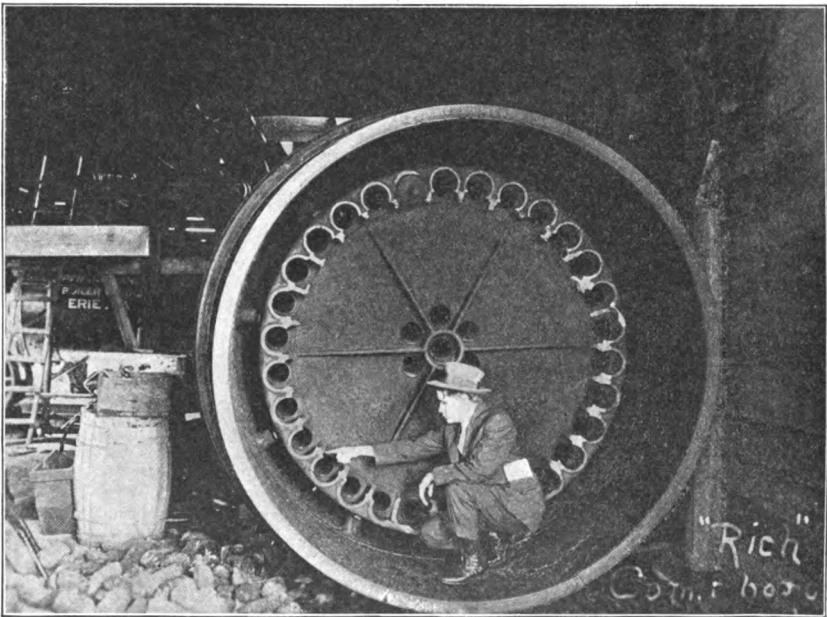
THE INSIDE OF THE EXPLODED DRYER HEAD.
